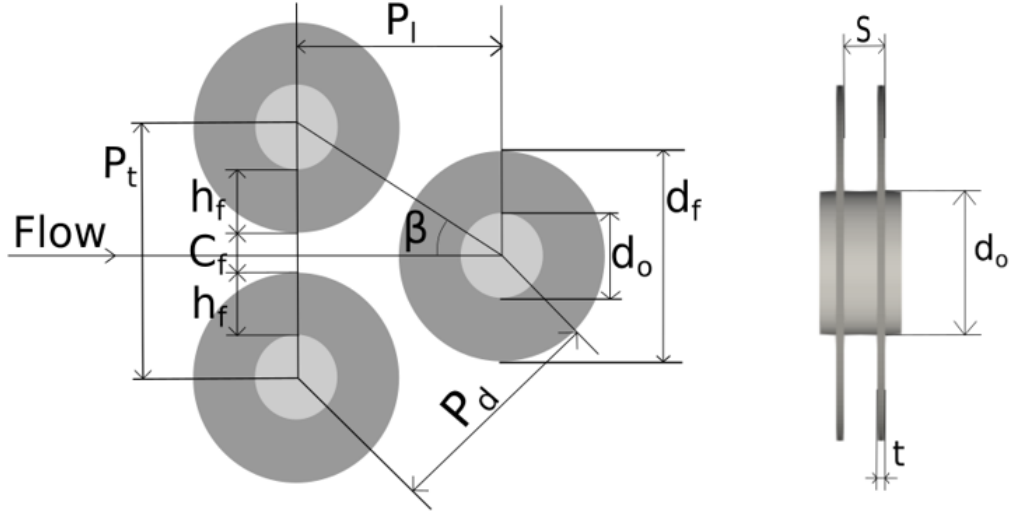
Definition of finned-tube and finned-tube bundle dimensions
